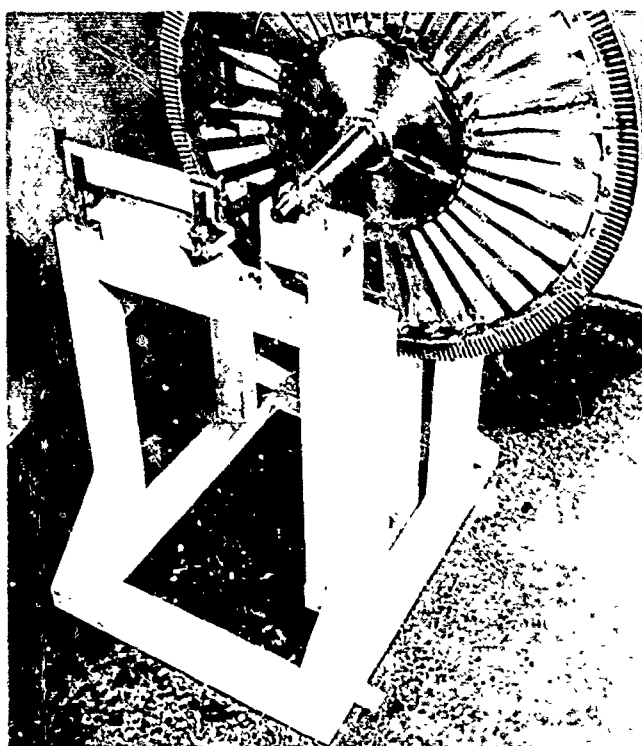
ROTOR BALANCE AND INSPECTION STAND
